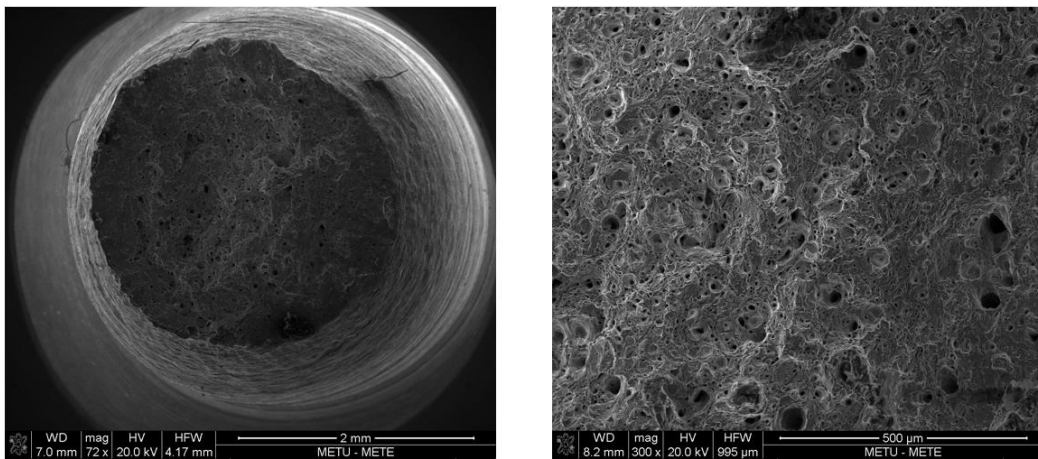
Fracture surface of specimens obtained from production 5
